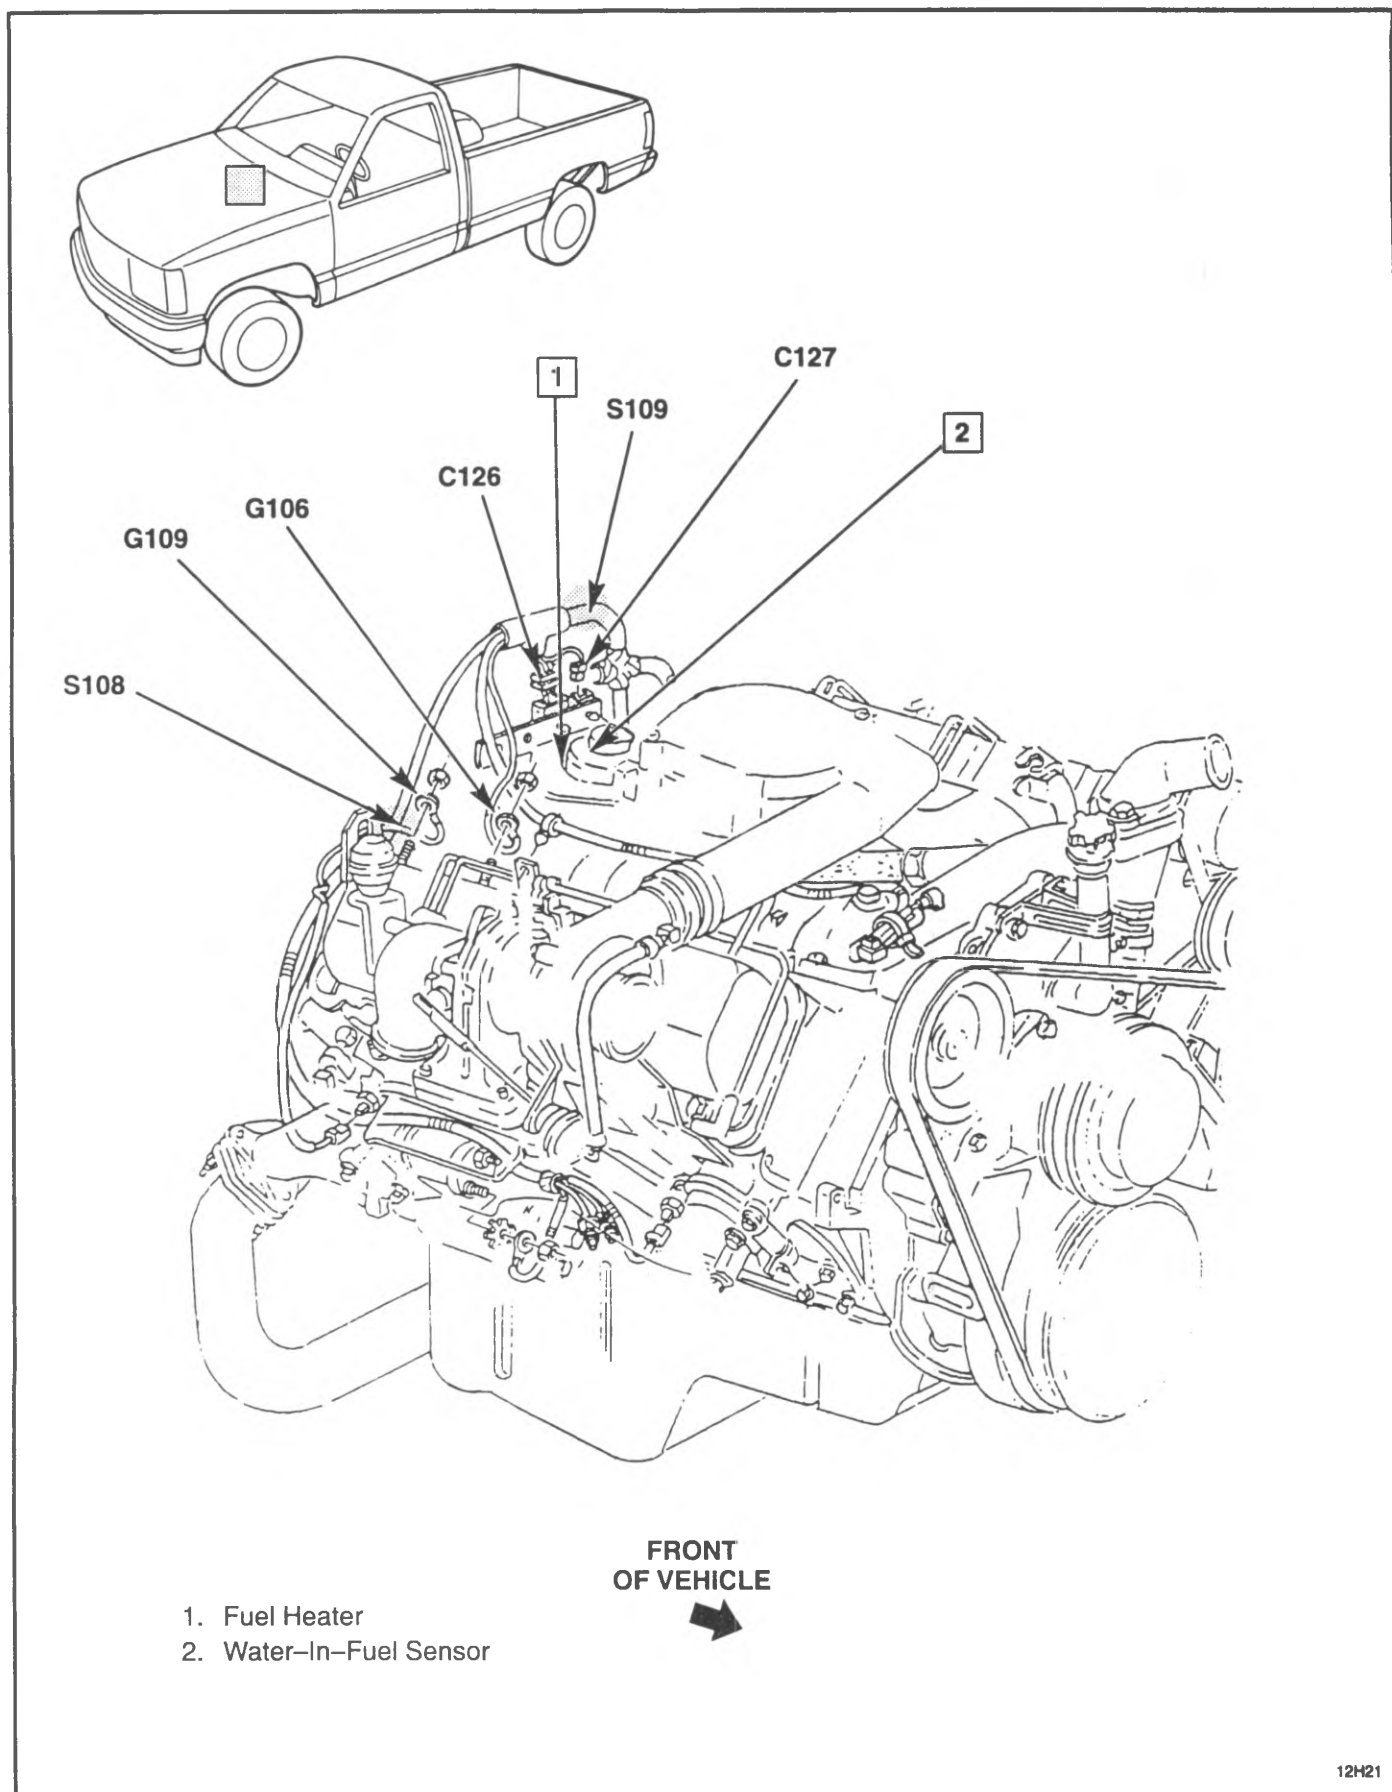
Turbo Diesel Engine Wiring, RH Side
